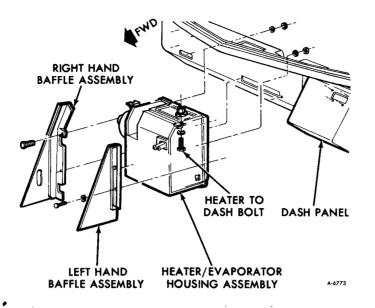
Heater/Evaporator Housing Assembly with Baffles (403 cu. in. Engine)
